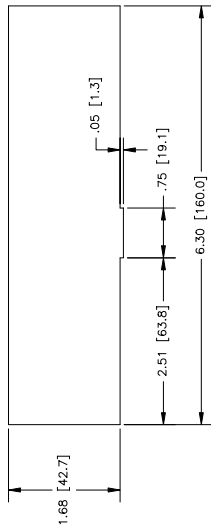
GTX 327 Connector/Rack Assembly Drawing
